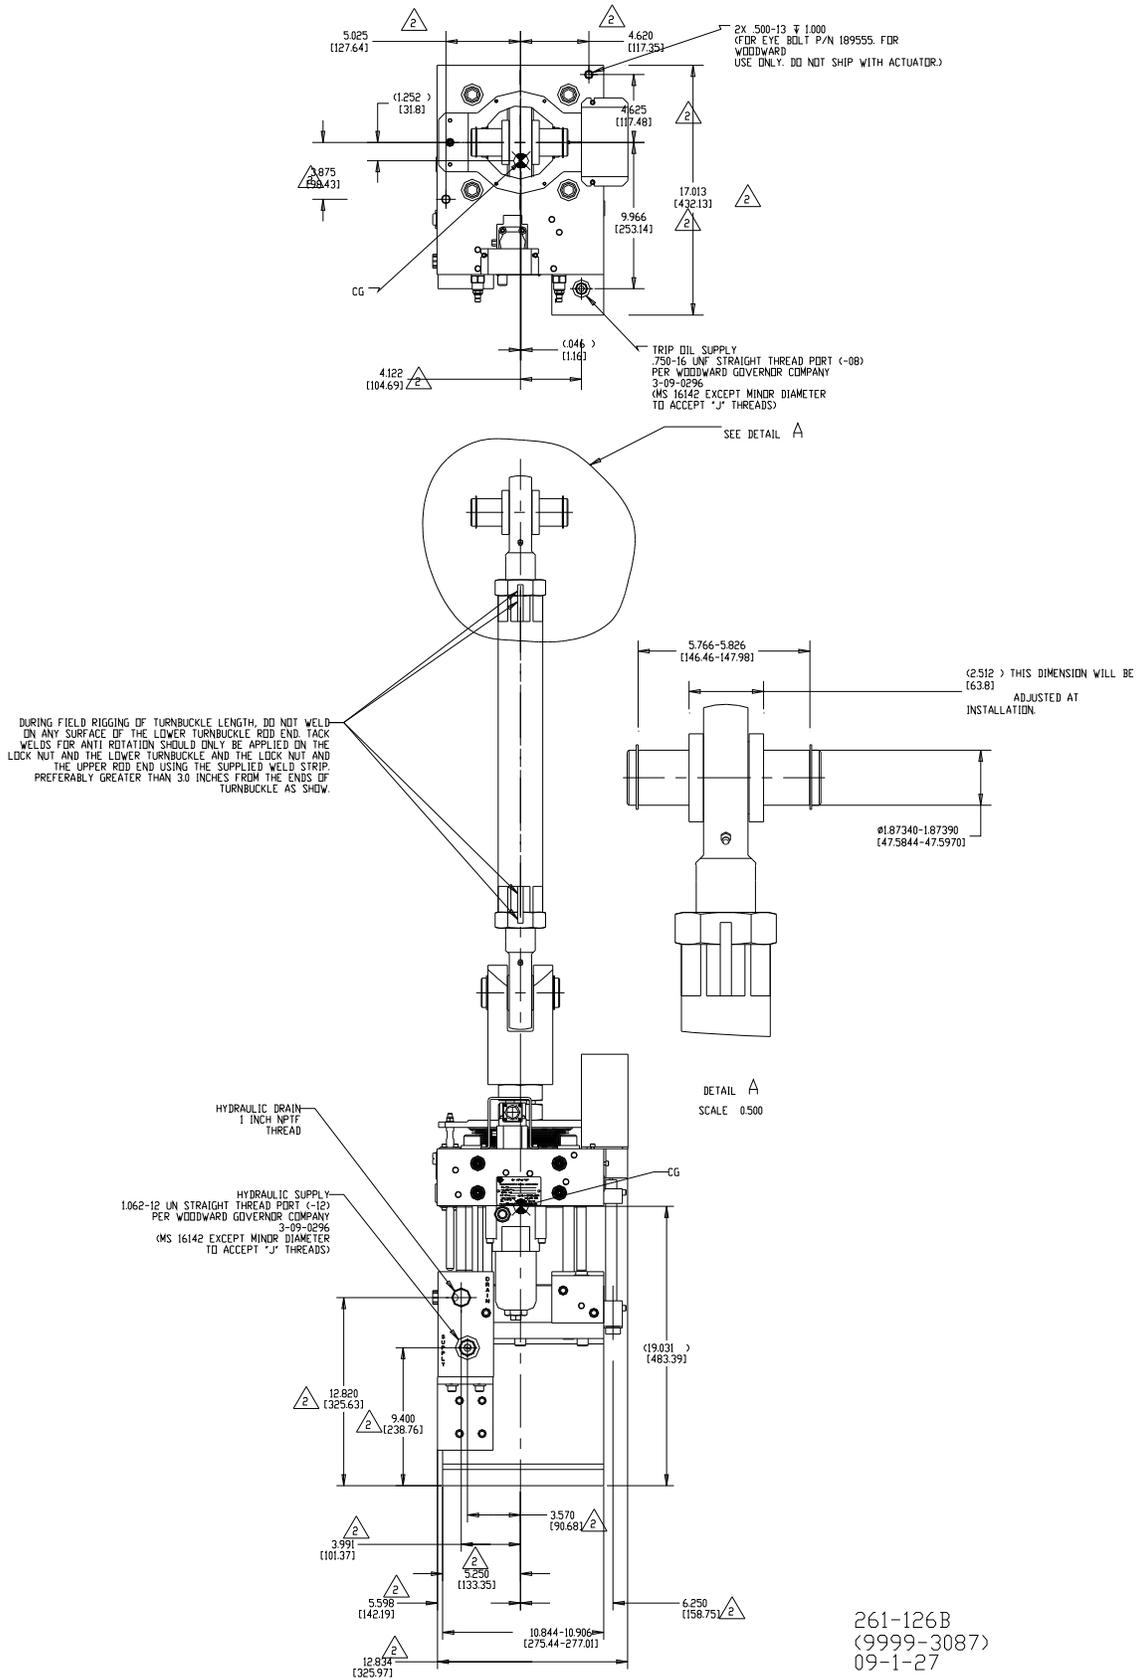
9F IGV Actuator, High Pressure Trip with Internal Check Valve (front and top views)
